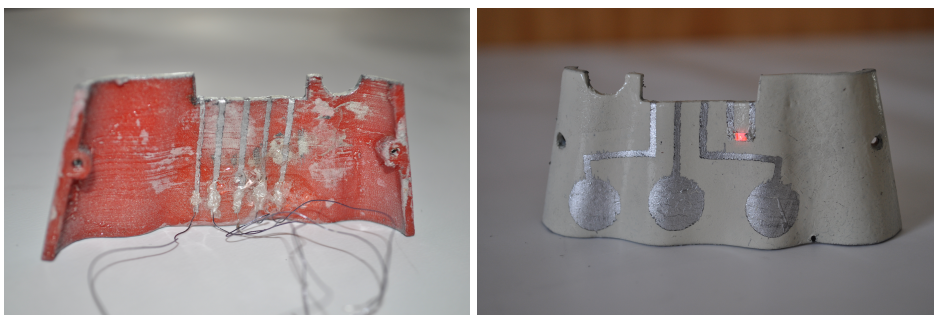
(A) Back part of the hand piece with connected wires using CSPP, (B) Front part of the hand piece after applying the protective plastic spray.
